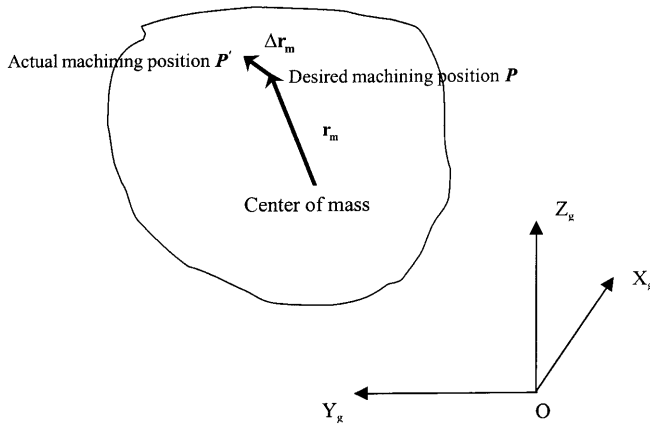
The workpiece location error $\Delta \mathbf{r}_m$ due to clamping and machining.
